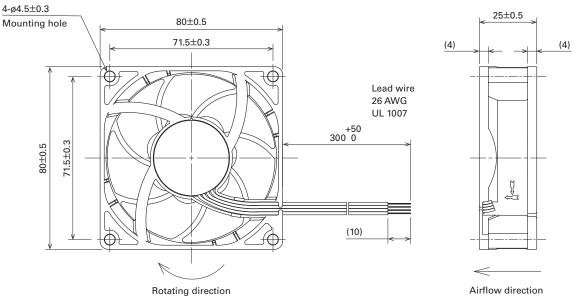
Dimensions of the new San Ace 80 (unit: mm)
